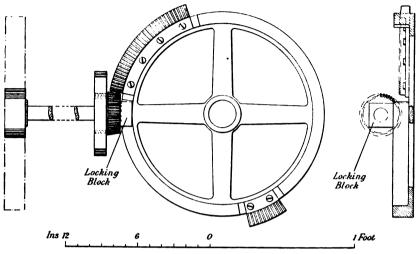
Linotype; interrupted-revolution driving-gear of mould-wheel.
